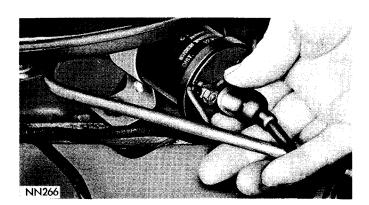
Installing Secondary Cable and Nipple at Coil Tower
